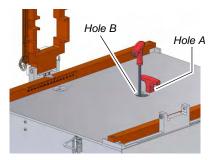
Insert T-bar into hole A, then use Hexagonal wrench to loosen bolts in hole B
